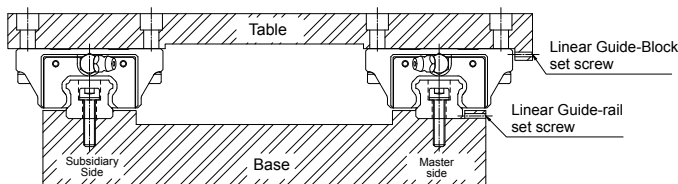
Mounting the Linear Guide on a Machine Susceptible to Vibration and Impact
